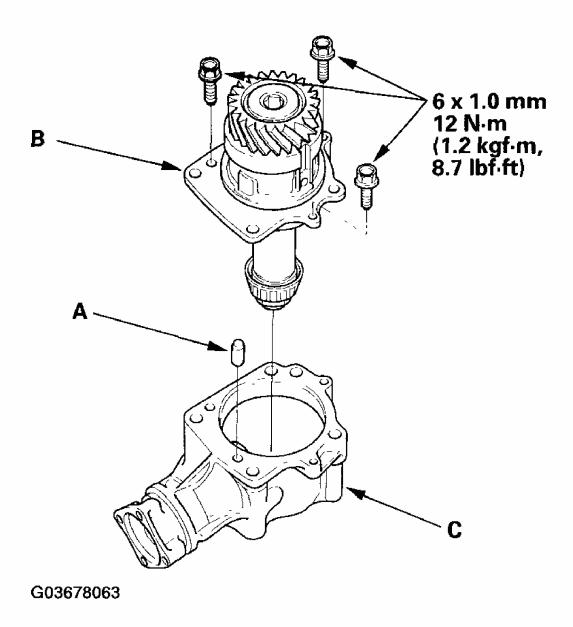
Installing Dowel Pin And Transfer Holder Assembly In Transfer Housing With Specified Torques
